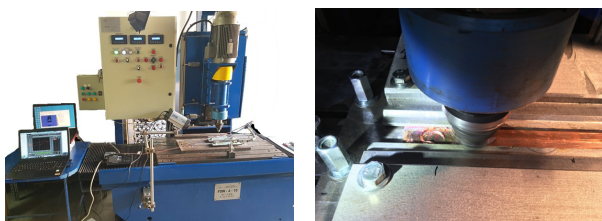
FSW 4-10 welding equipment, detail welding Cu 99
